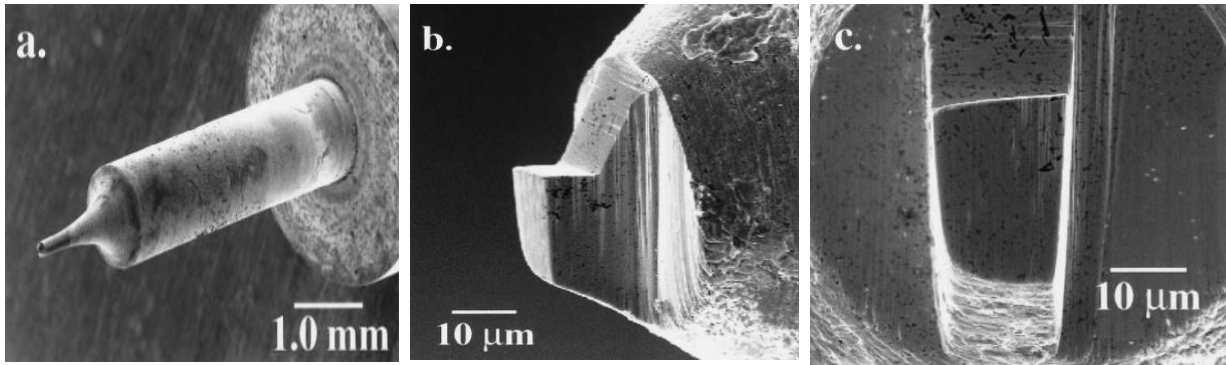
Fabricated microtool by FIB (a) top view, (b) back rake facet, and (c) side rake facet [30]
